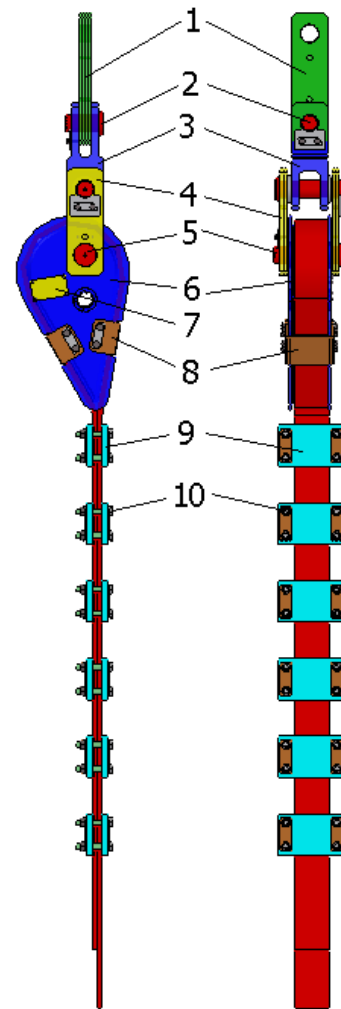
flat cable connecting device for equilibrium DLCLE 118
